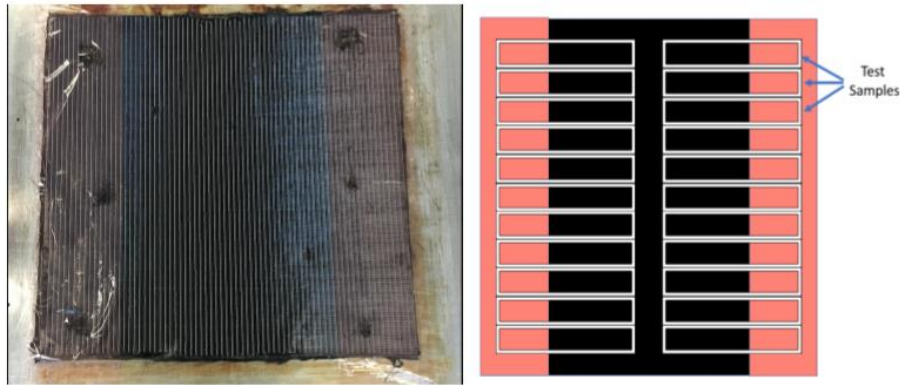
Positioning of the crack-starter. On the left, PTFE crack-starter film is held in place by drops of resin. On the right, illustrative explanation of the layout of samples within a panel where the pink section is the PTFE layer.
